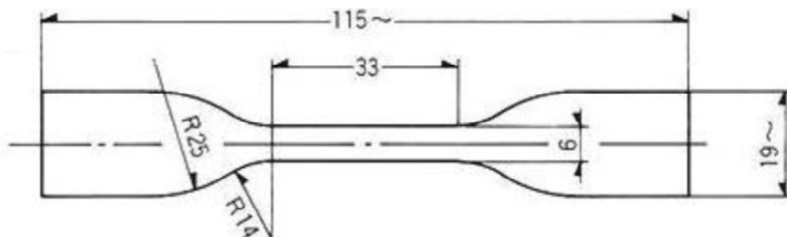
Detail of the sample dimensions (in mm) according to ASTM D638 Type IV.
